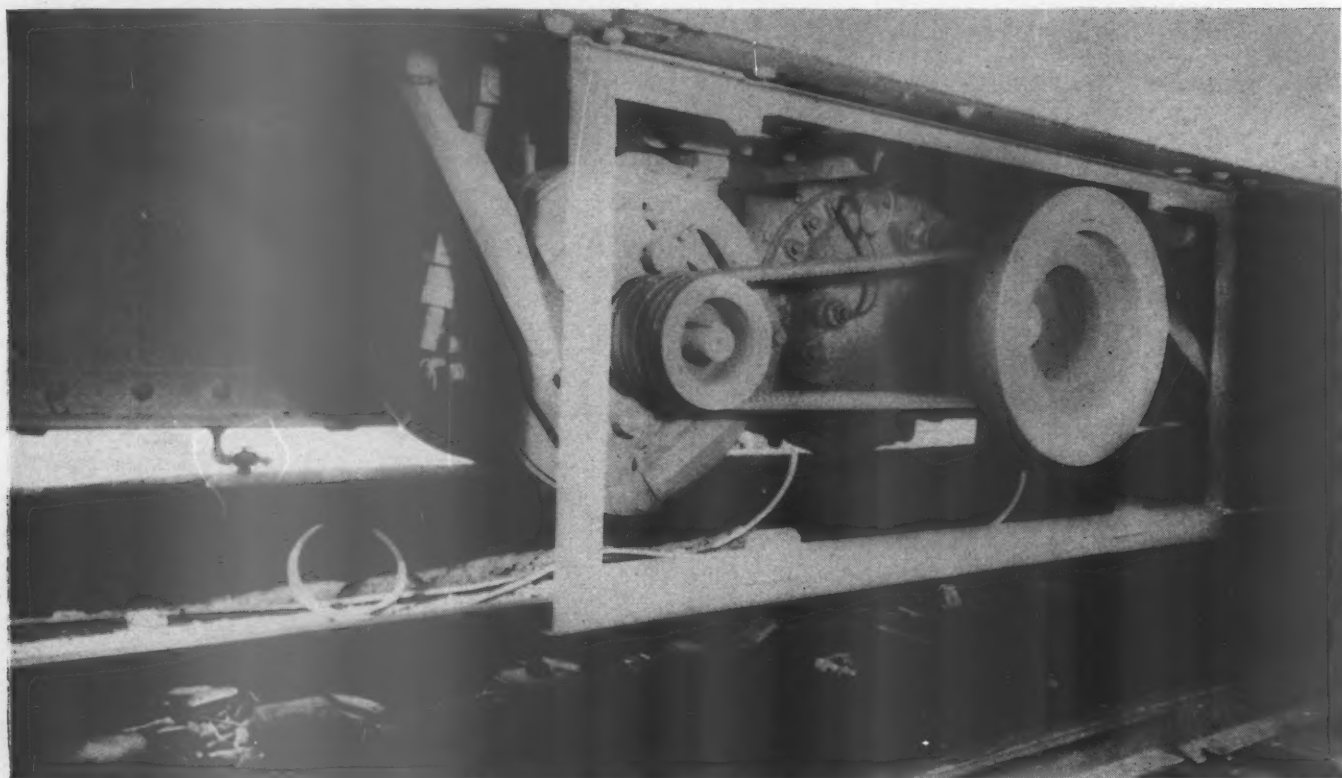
Arc welded suspension with compressor and motor under a passenger car frame
